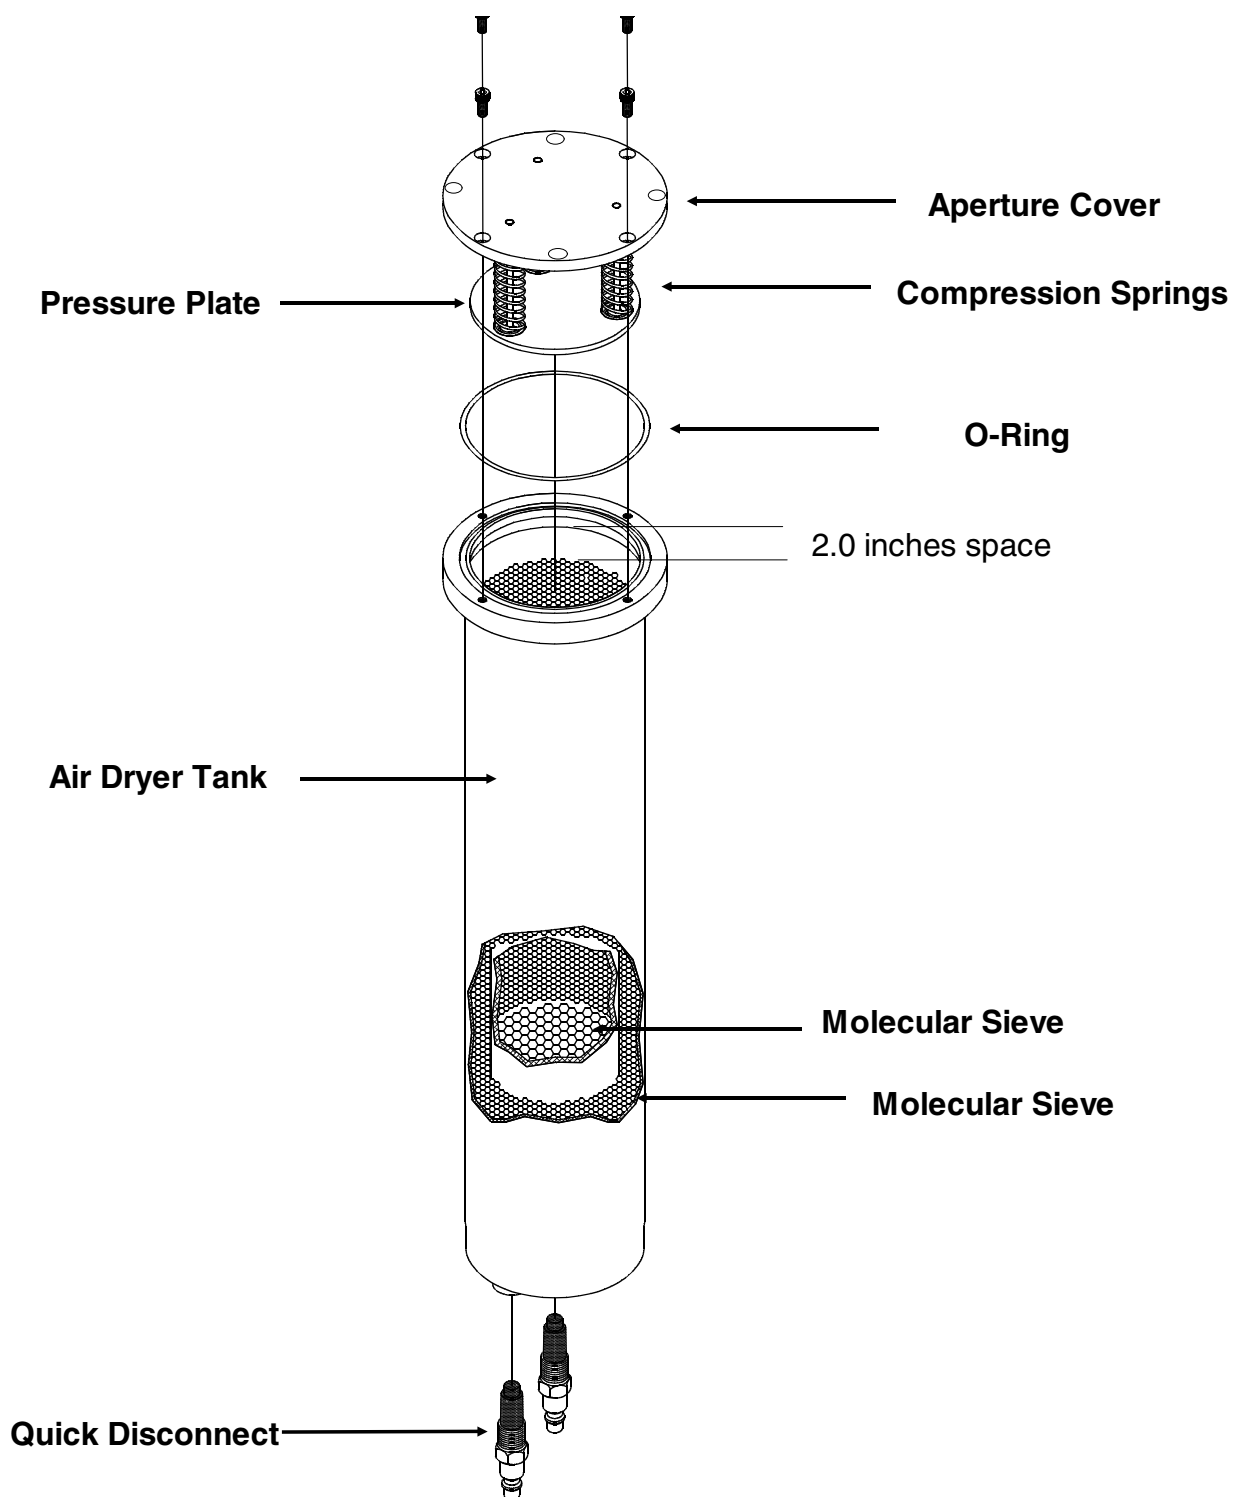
1, Air Dryer Tank Cut-Away View
